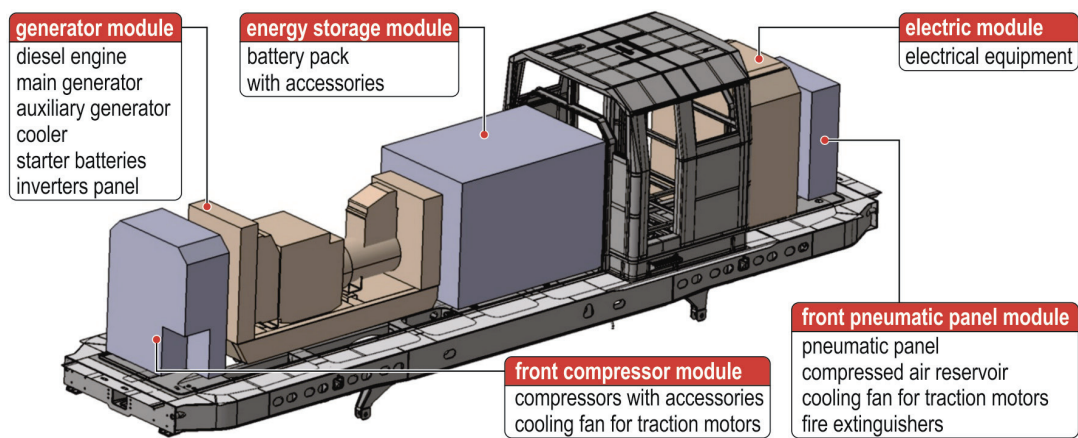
CAD model of the modernized SM42 hybrid locomotive without bogies, chassis components and skin plate
